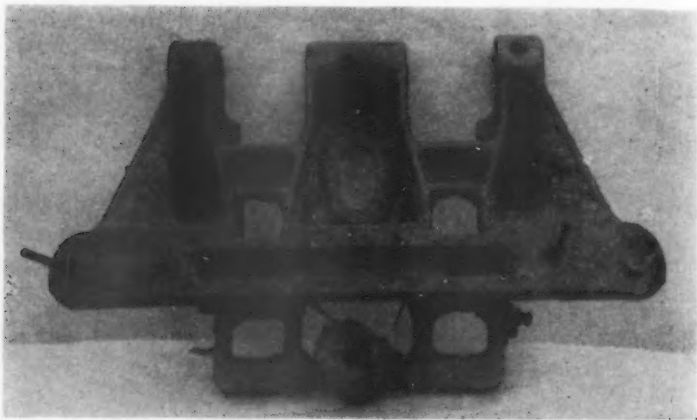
CASTING AS TAKEN FROM THE MOLD.
